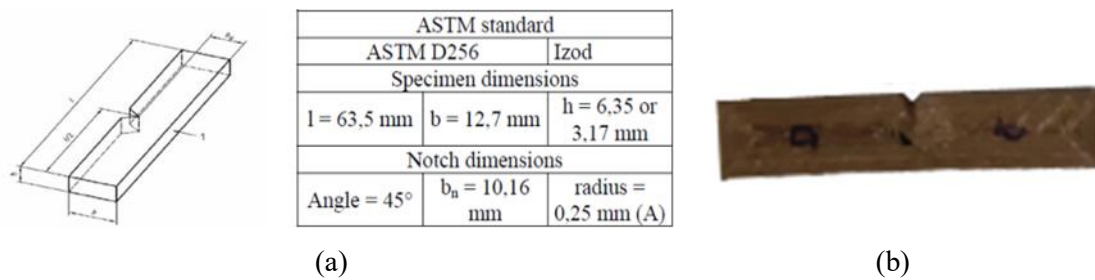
(a) specimen's geometry and dimensions conform to the ASTM D256 standard (b) A sample of printed impact specimen
